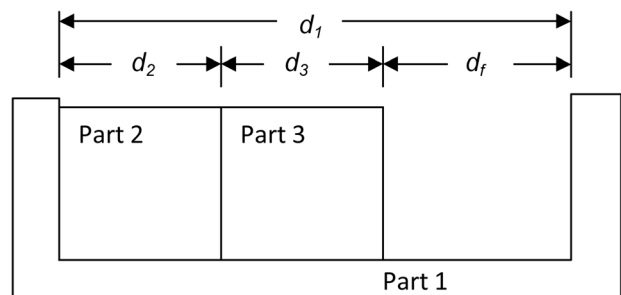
A simple 1-dimensional example showing tolerance analysis with only dimensional tolerances
